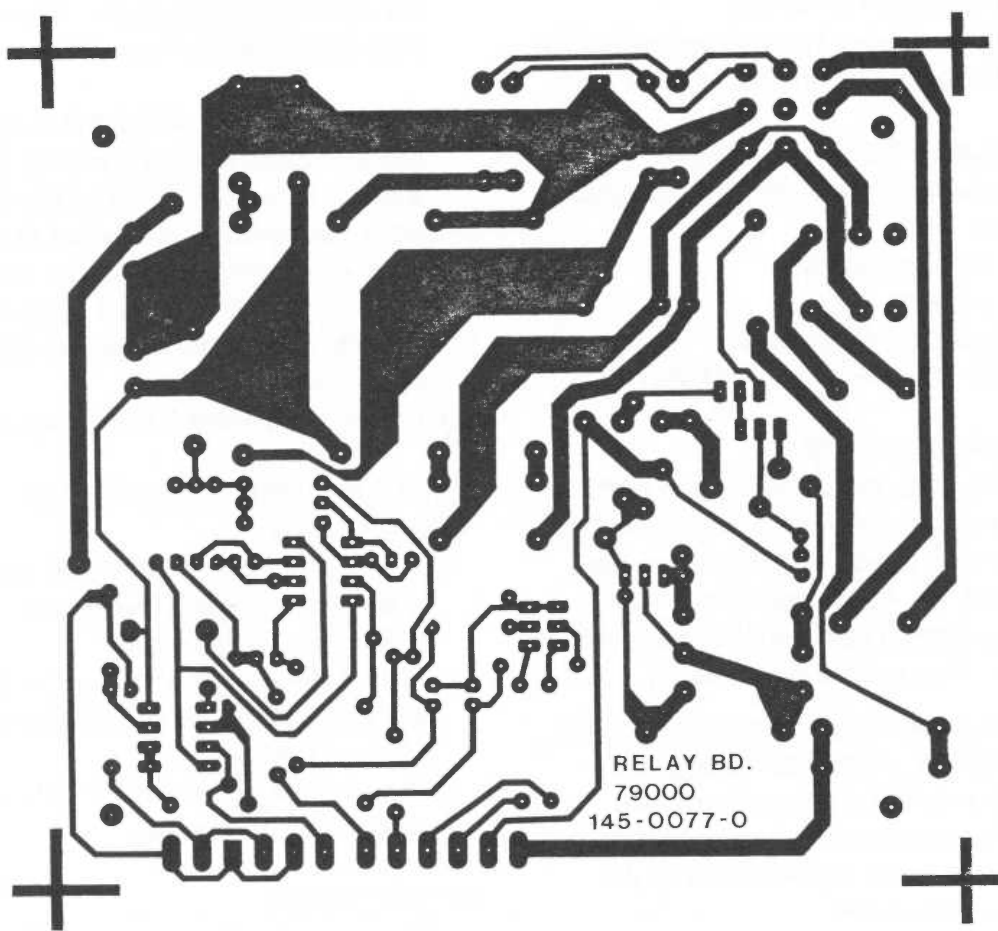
Foil Pattern, A30 Relay PCB
